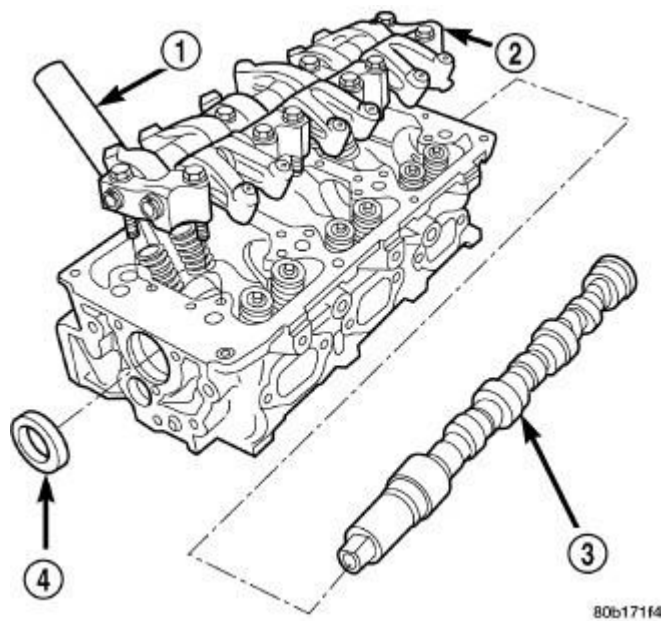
Cylinder Head, Camshaft & Rocker Arms
